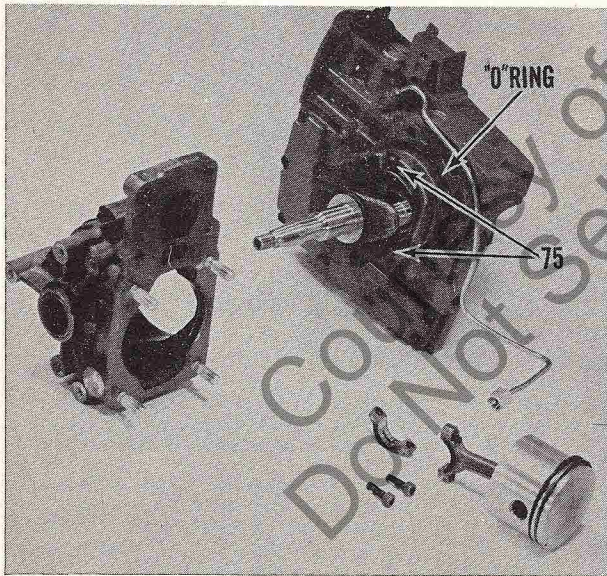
B—View showing crankcase removed from drive case and crankshaft on models equipped with ball bearing at drive end of crankshaft. To remove crankshaft from drive case, bearing retaining screws (75) must first be removed.
